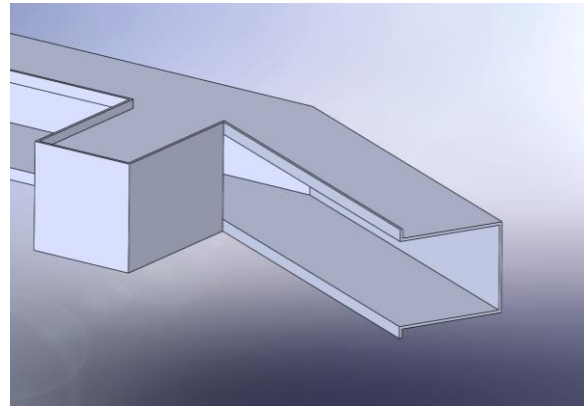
(g) Side View of Open Hat Sectioned Bumper Beam
